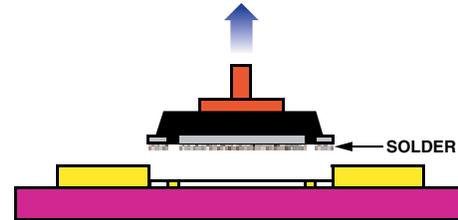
Vacuum Cup Retrieves LFCSP from Stencil Without Disturbing Solder Paste
